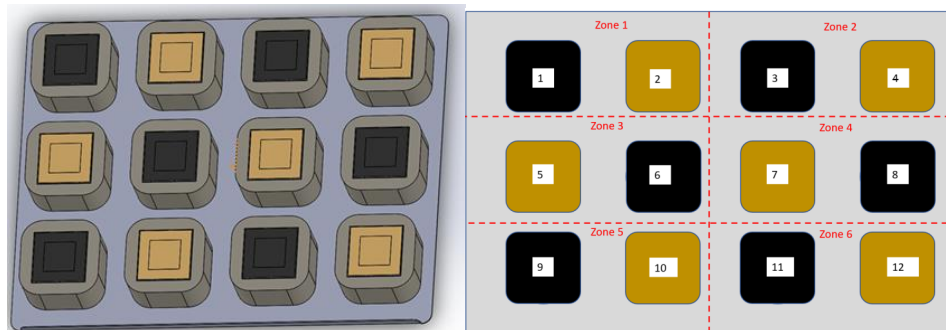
Twelve heat flux sensor array CAD assembly (left) and assembly layout and numbering (right)
